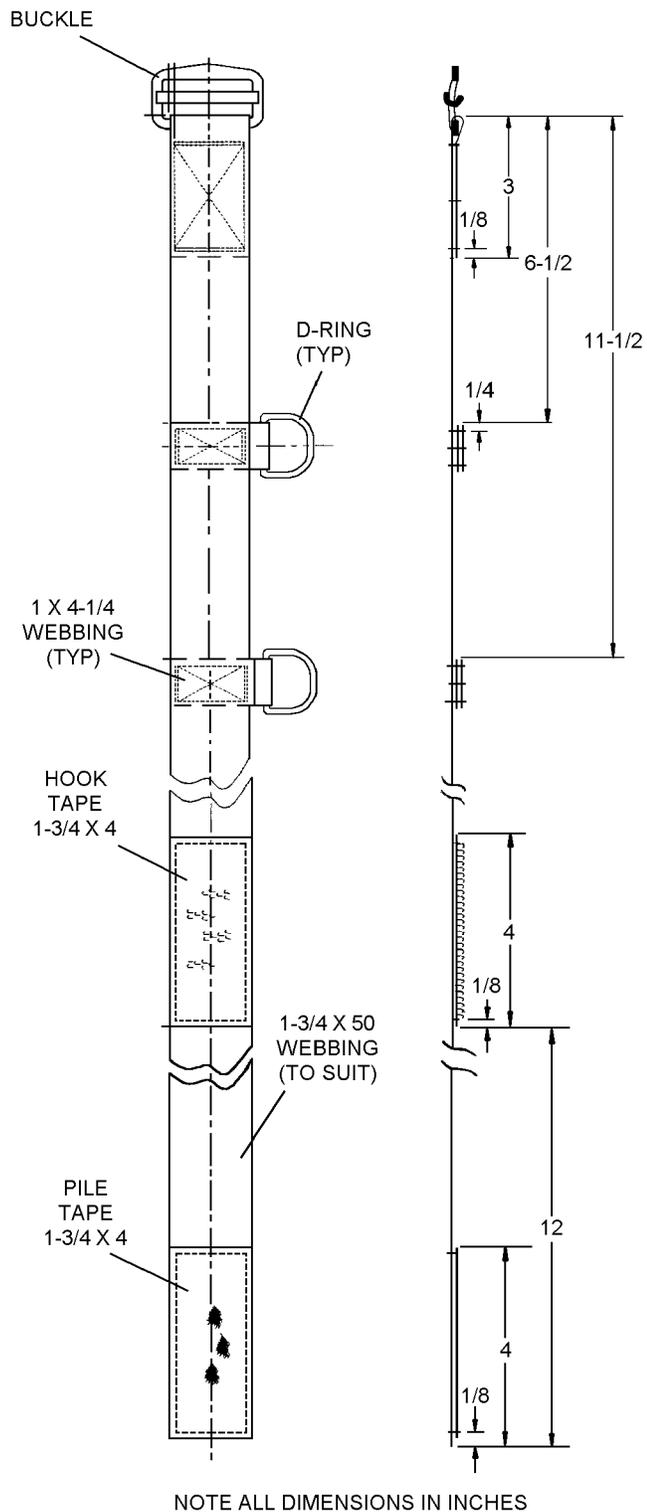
SAR Belt Assembly – Flat and Edge View
